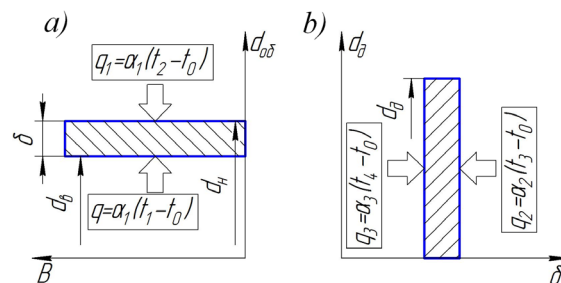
a, b* – Design parameters of metal friction elements: *a* - working surfaces of the pulley rim and drum; *b* - surfaces of a solid disk and heat fluxes generated on their working surfaces
